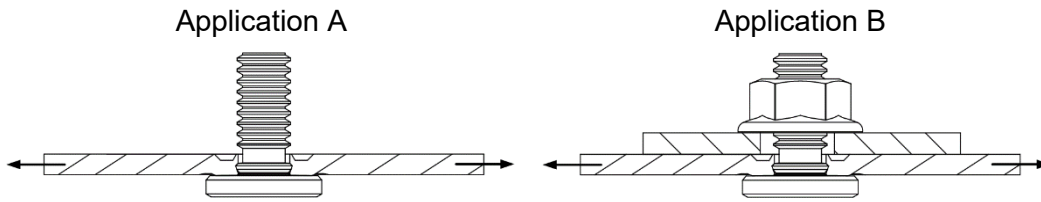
Non bolted (left) and bolted press-bolt joint (right) with transverse loading
